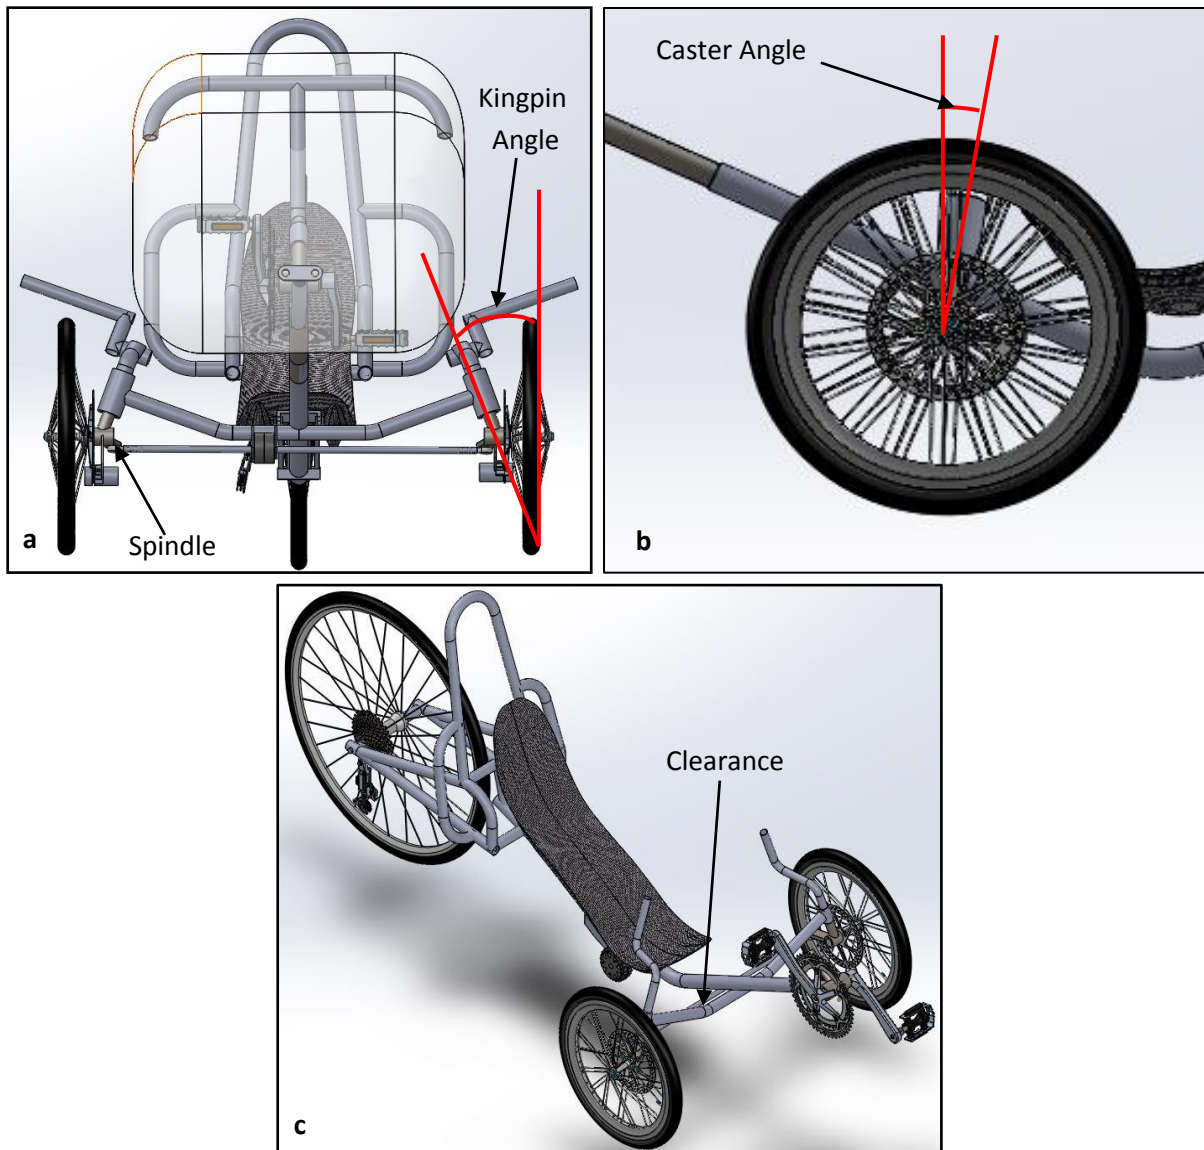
A SolidWorks model of vehicle showing the a) kingpin angle. b) caster angle. c) clearance between the tie rod and the frame.
